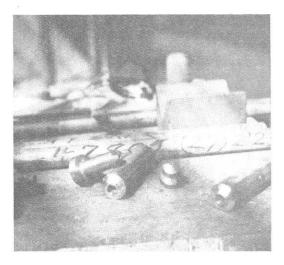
HEAVY WALL PIPE SECTIONS SHOWING EDGE PREPARATION
